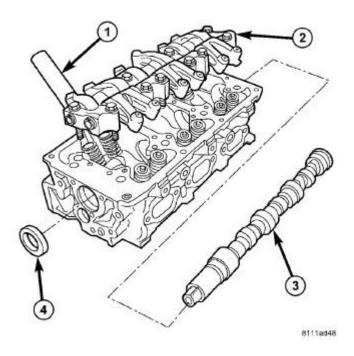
Camshaft, Rocker Arm Assembly & Cylinder Head Courtesy of CHRYSLER LLC
